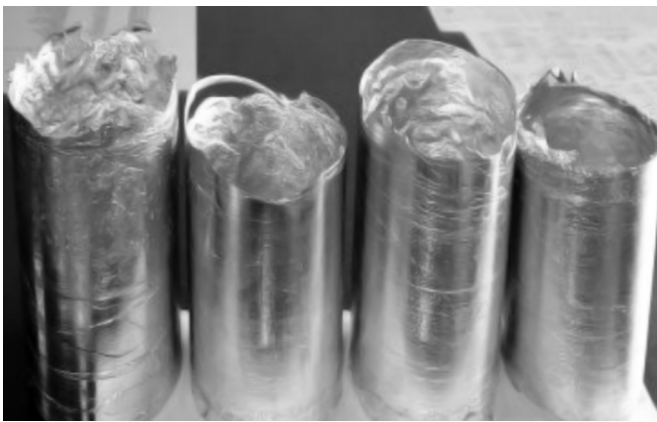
Casting of 2 mm thick cylinders at 100, 200, 800, 1600 rpm from left to right, respectively.
